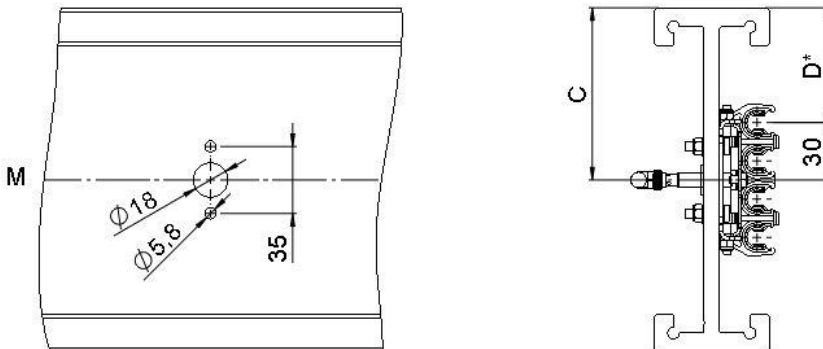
Example: Bore hole pattern sliding contact sensor unit (4-poles)
